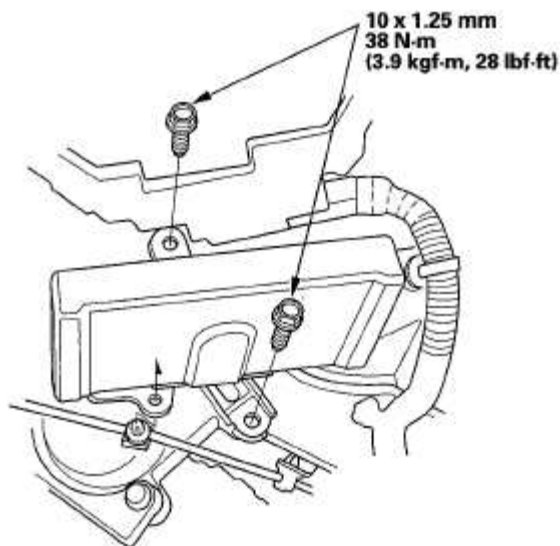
Identifying Engine Control Module (ECM) Bracket And Clutch Line Clamp w/Torque Spec.
